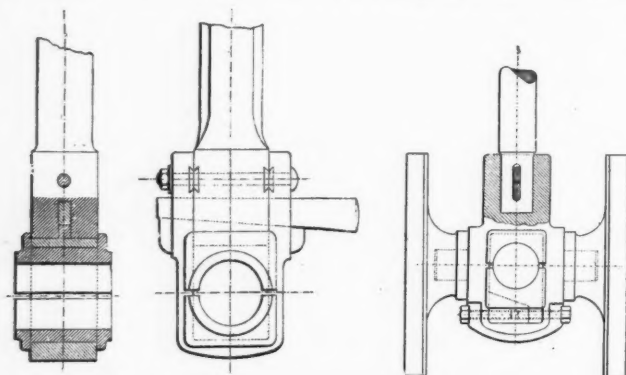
CONNECTING ROD AND CROSSHEAD.
